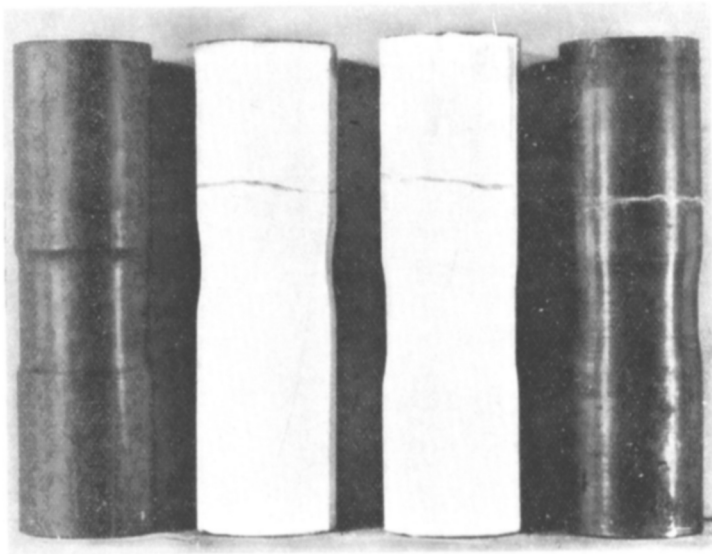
TEST SPECIMENS THAT CRACKED AT THE END OF THE COLLET
